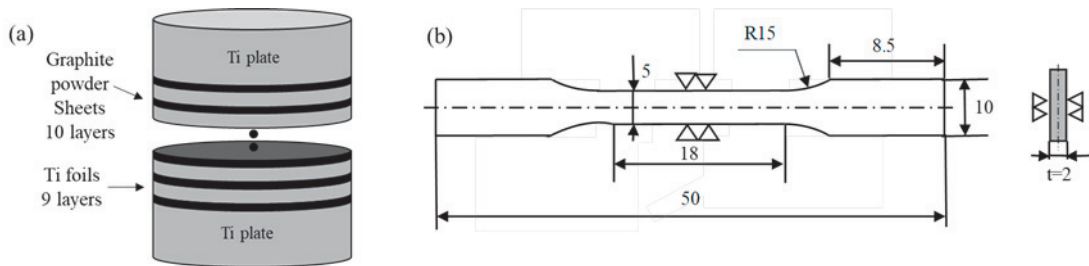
(a) Schematic illustrations of preparation processes of large-scale samples; (b) Image of shape of tensile specimen (ASTM test method E8M-11, unit: mm)
